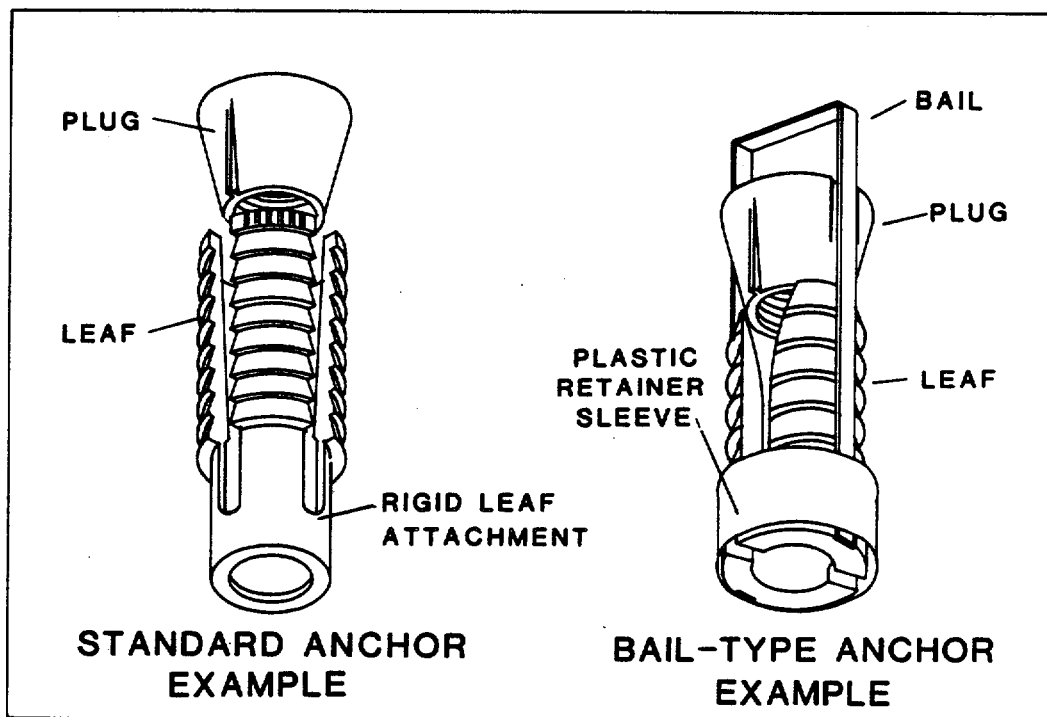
Mechanical Anchors - Standard, left; Bail, right
